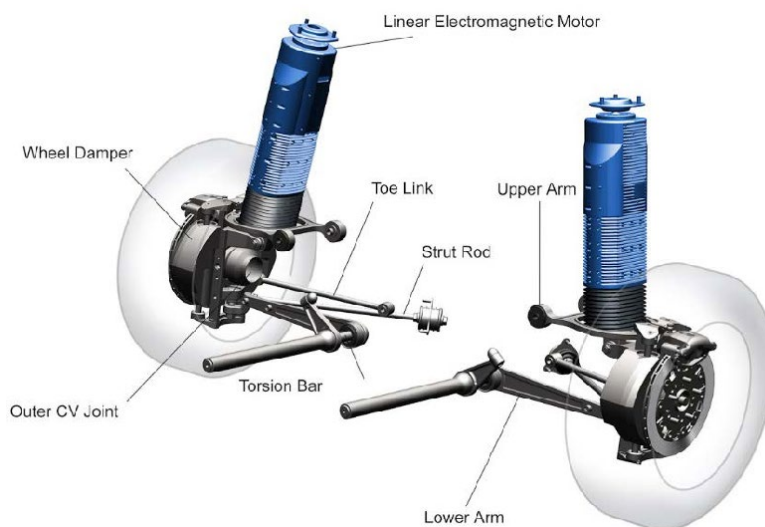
Electric wheel integration scheme based on in-wheel vibration reduction system
